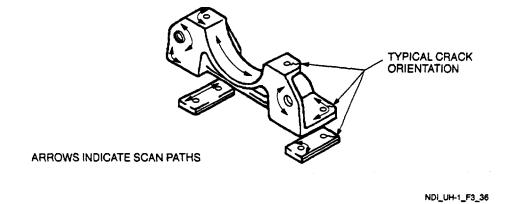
Tail Rotor Driveshaft Hanger Support Fittings
